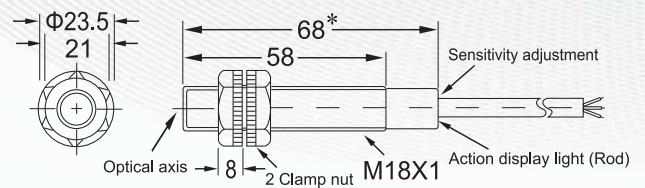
PHOTO ELECTRIC SENSOR - 18mm (Diffuse & through Beam)
